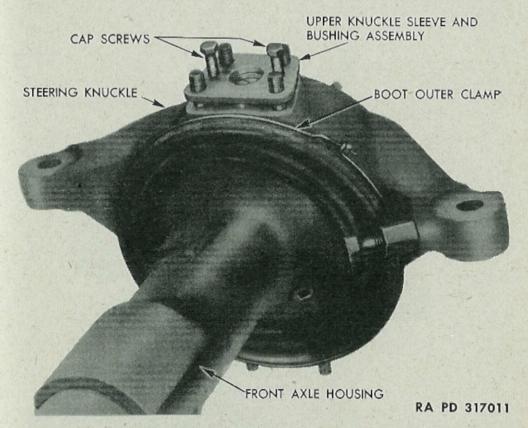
Removing Knuckle Sleeve and Bushing from Trunnion
